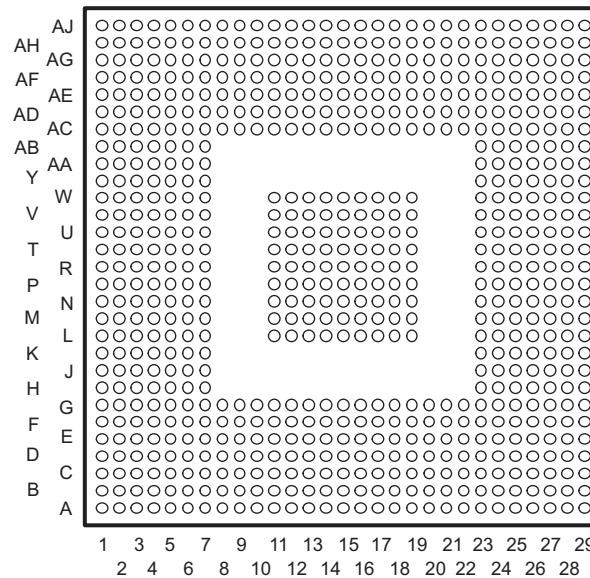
CTZ/GTZ/ZTZ BGA Package (Bottom View)
